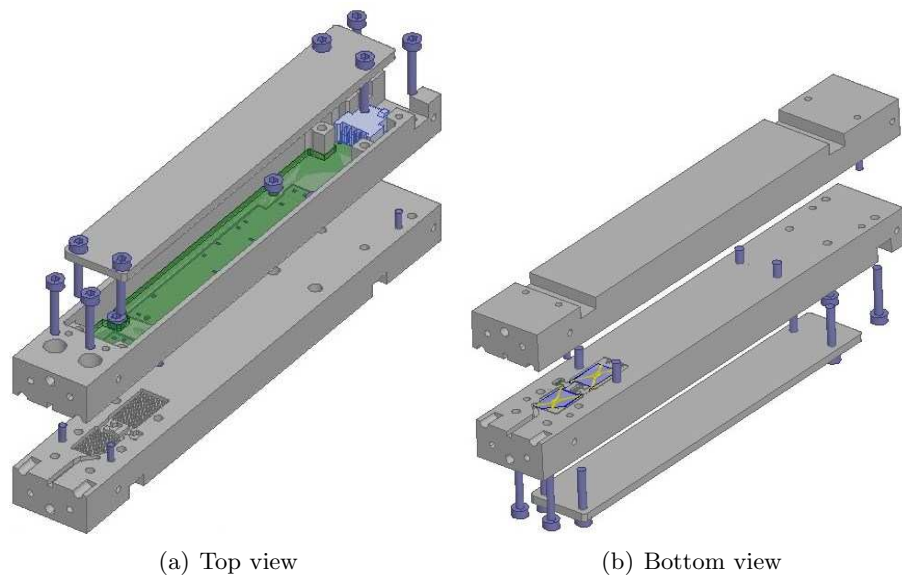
Designed packaging of the W-band auto-calibrated receiver; a) top and b) bottom view of the blocks which are part of the packaging. The DC circuit and the connector are included.
